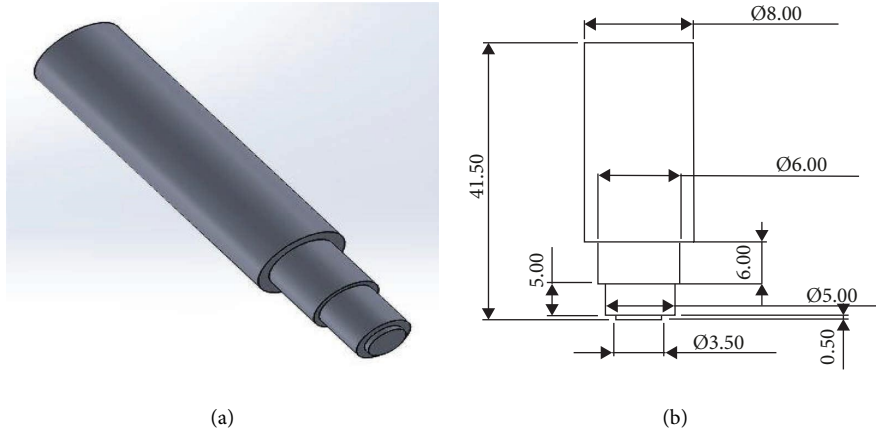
Microfriction stir welding tool design (a) and tool dimensions (b).
